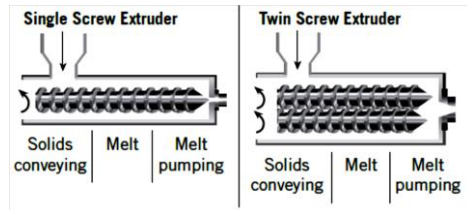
Cross-section of single and twin screw extruder barrel.
